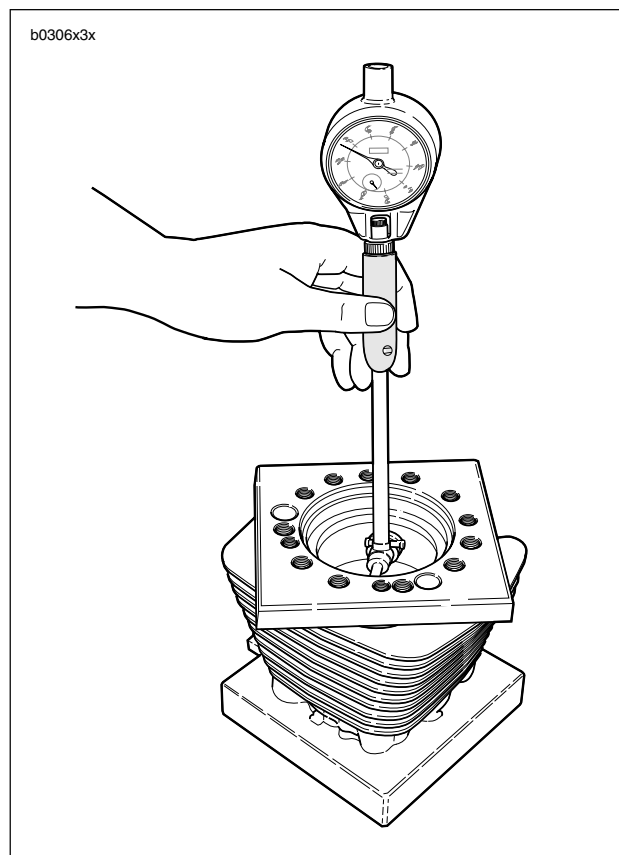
Measuring Cylinder Bore Using Torque Plates (Part No. HD-33446A)
